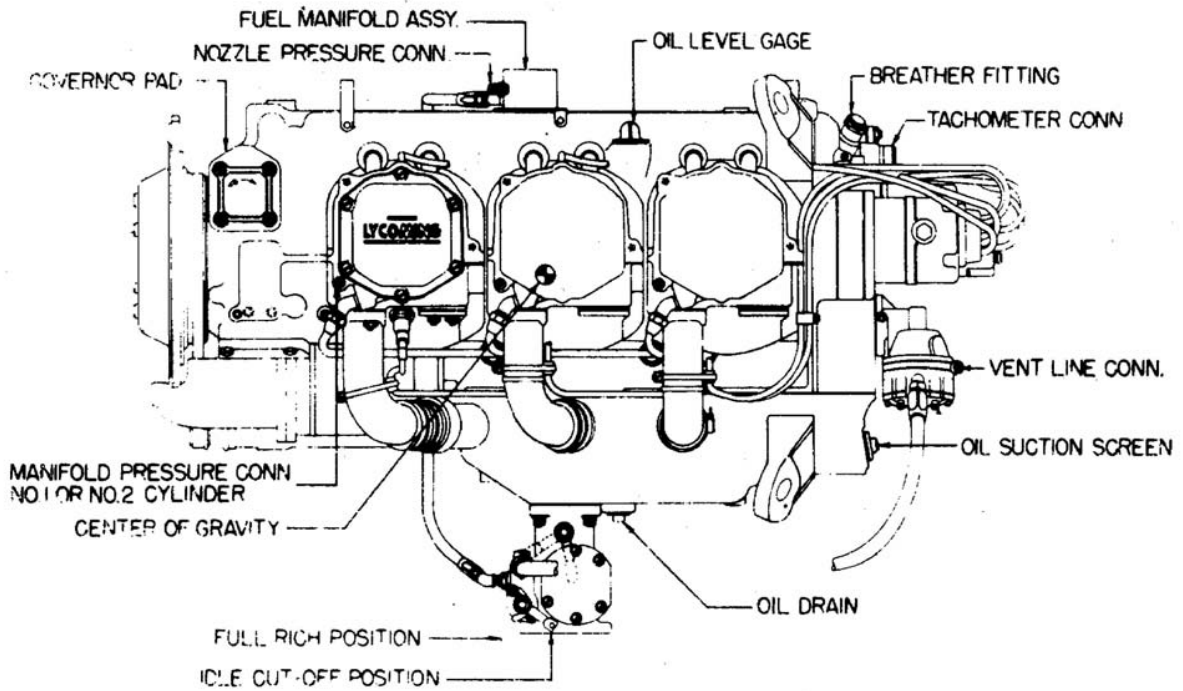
Installation Drawing – Left Side View – IO-540-C, -D, -J, -N
